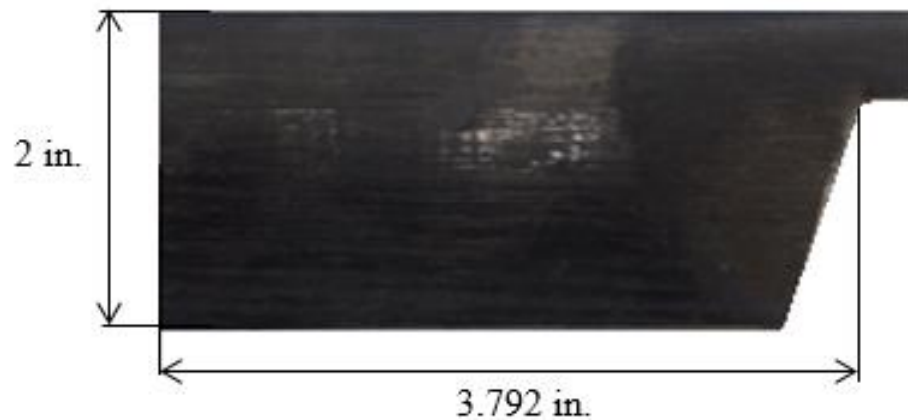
Manufactured blade with Eppler 395 hydrofoil and optimized solidity
